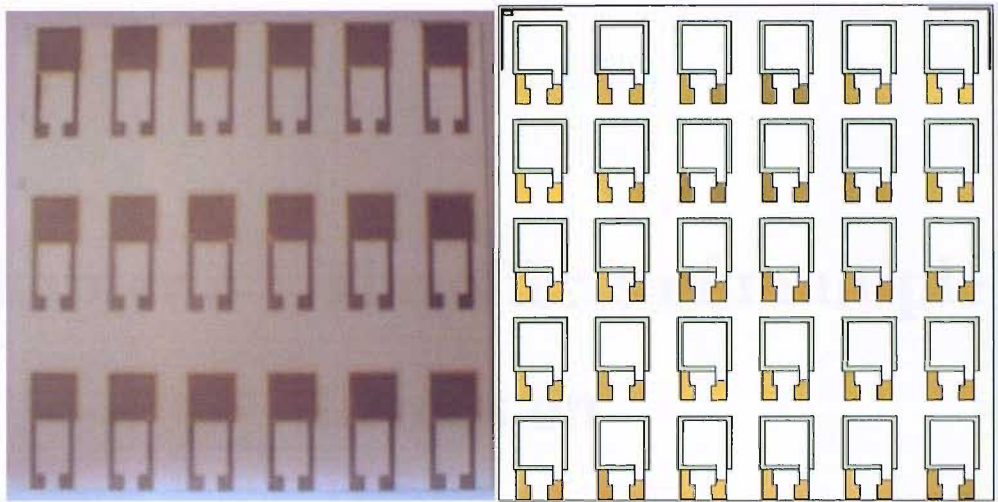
Device layouts on 4"x4" 96% alumina tiles: on the left hand side is a picture of the old design layout with 18 sample piezoelectric devices, on the right hand side is an Autodesk Inventor 10™ drawing of the new layout design incorporating 30 piezoelectric devices.
